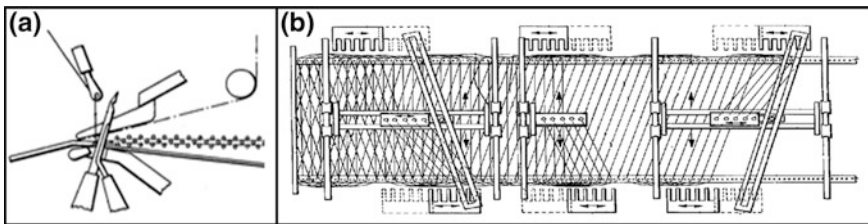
a Stitching unit. b Warp knitting machine [63]
